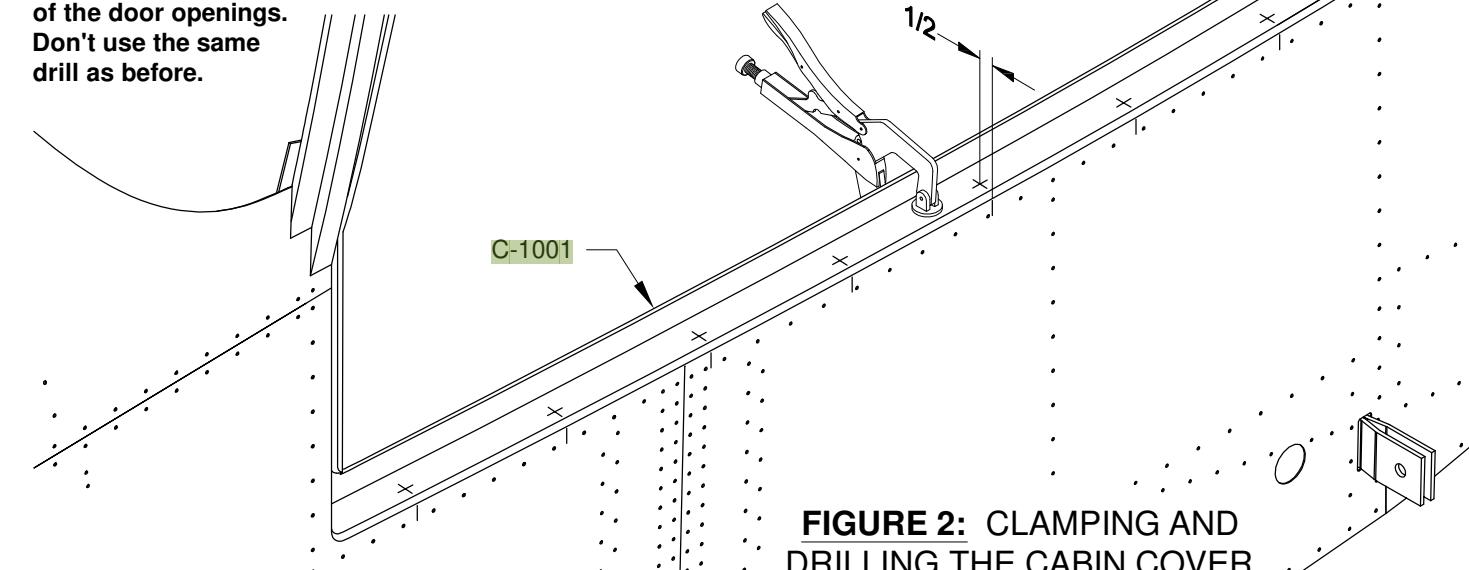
CLAMPING AND DRILLING THE CABIN COVER
